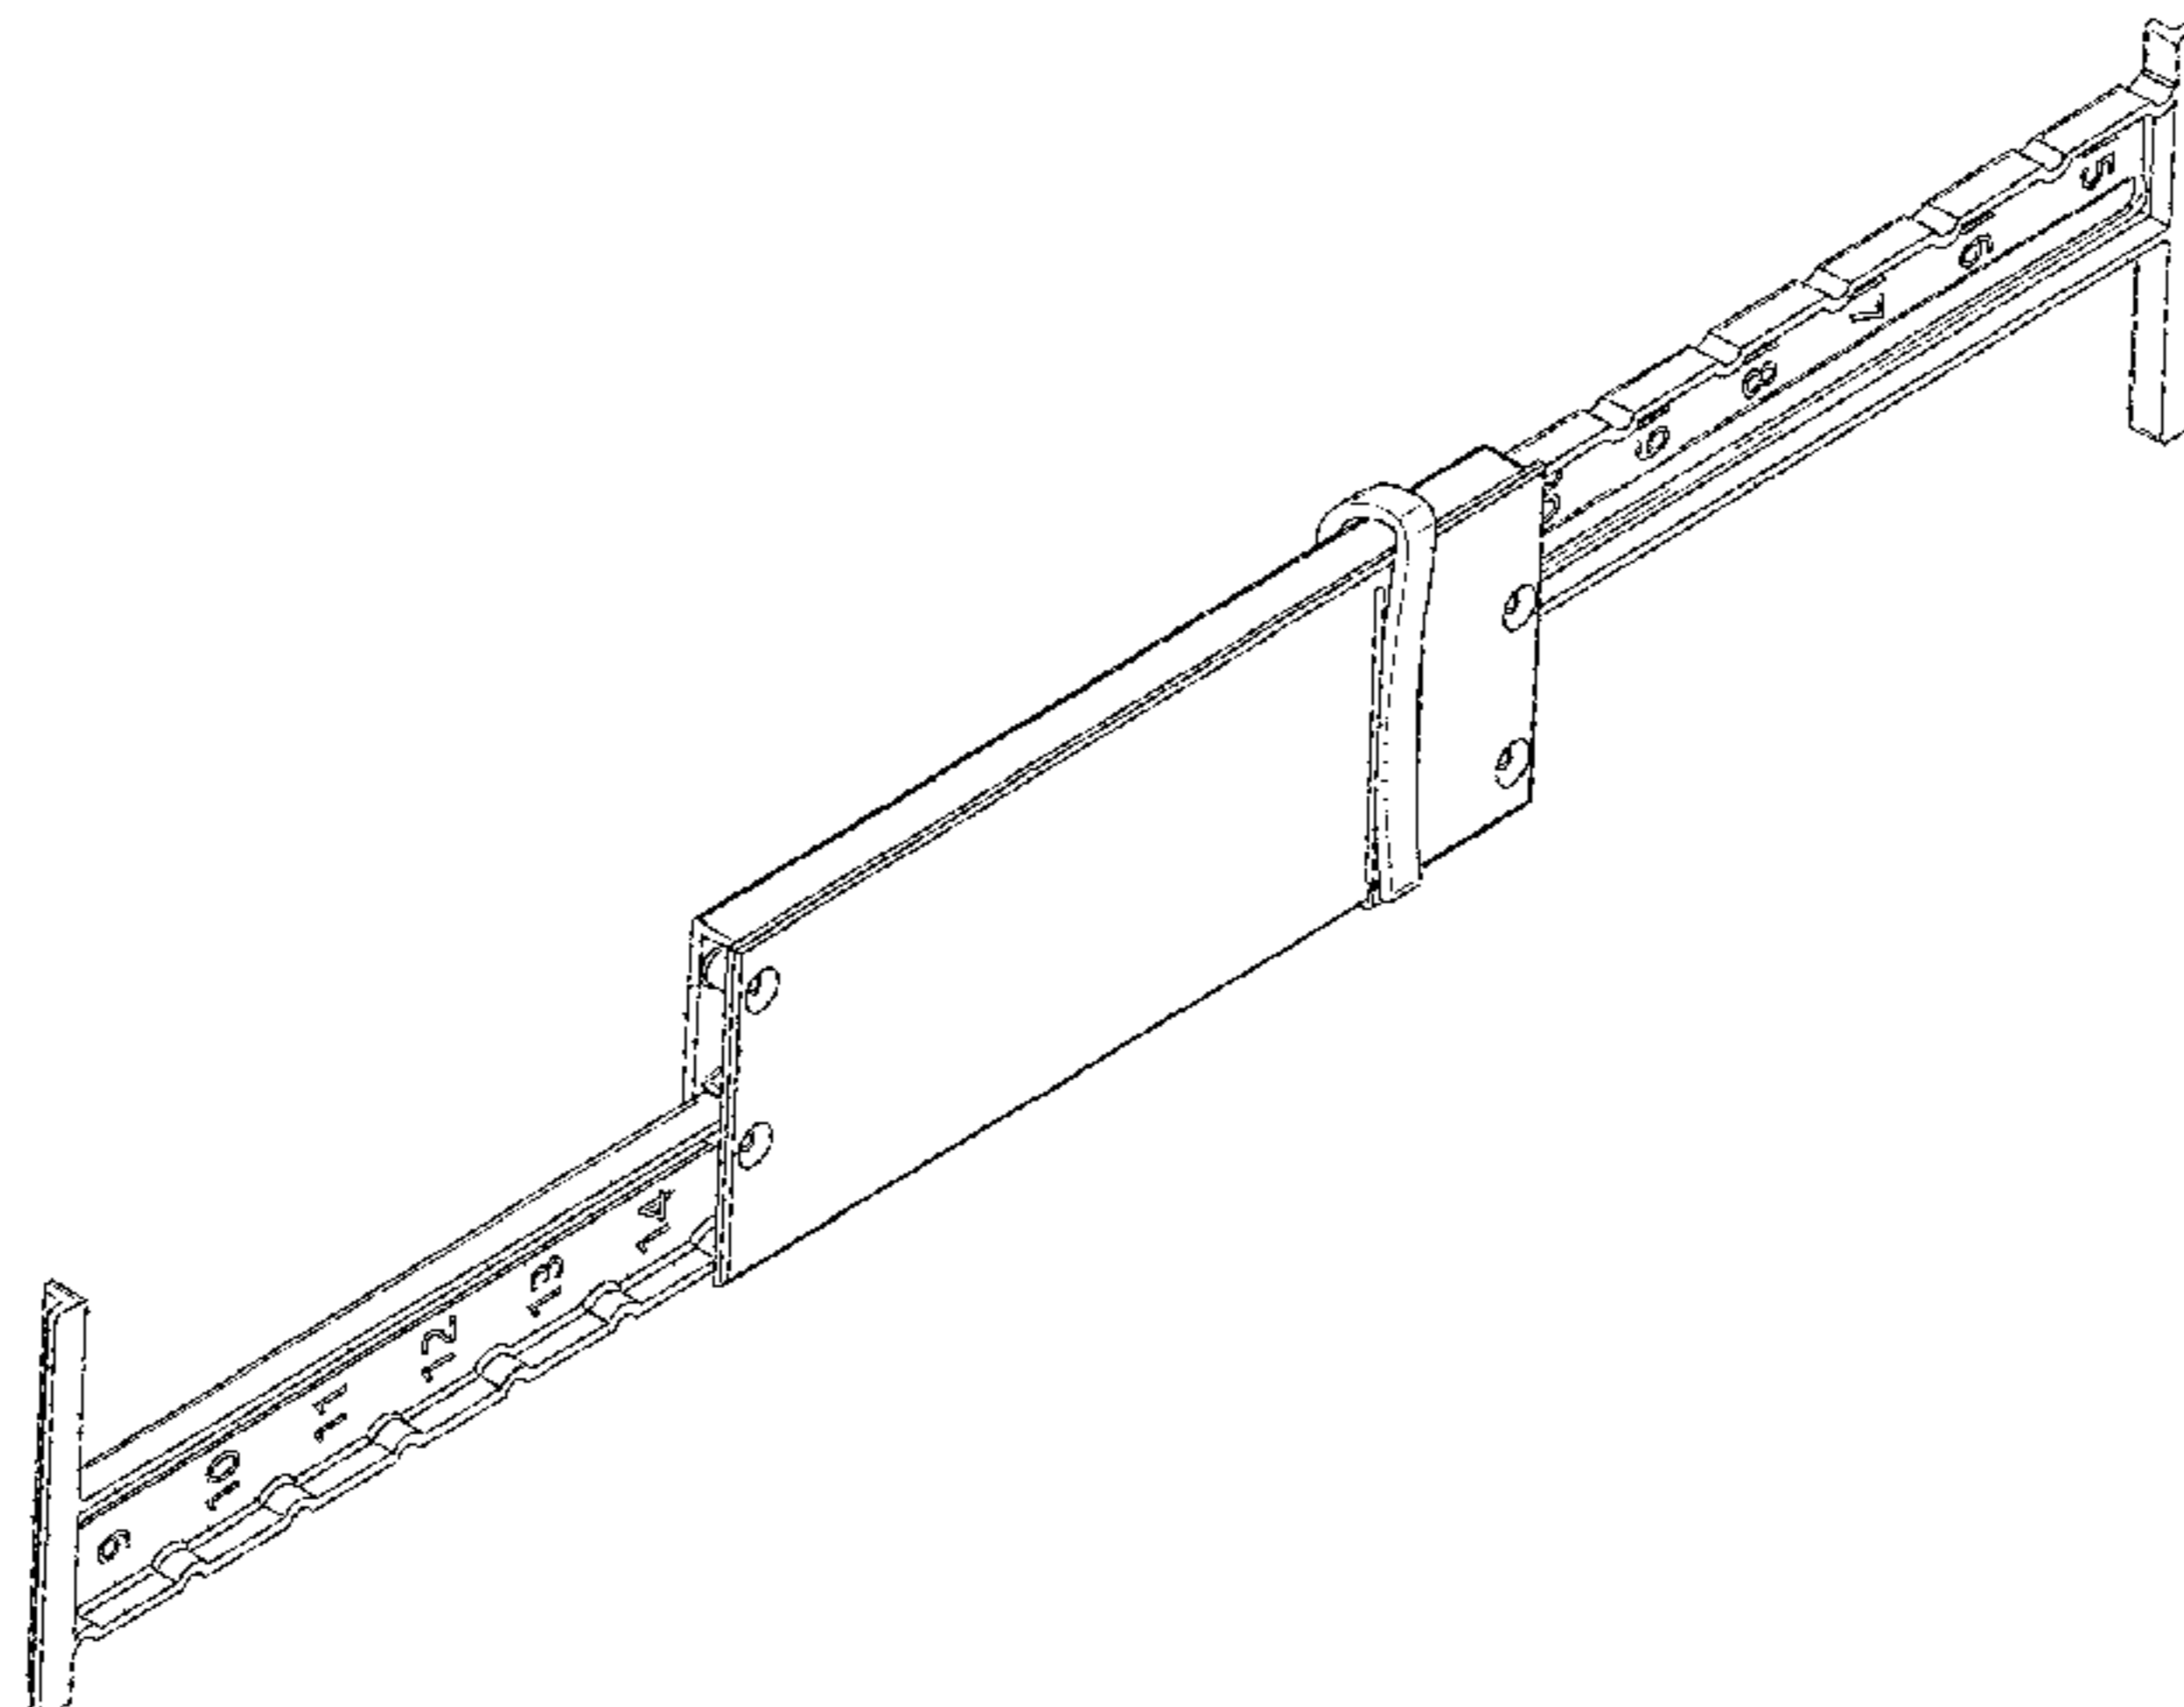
is a bottom view of the ribbon measuring tool of FIG. 6.
